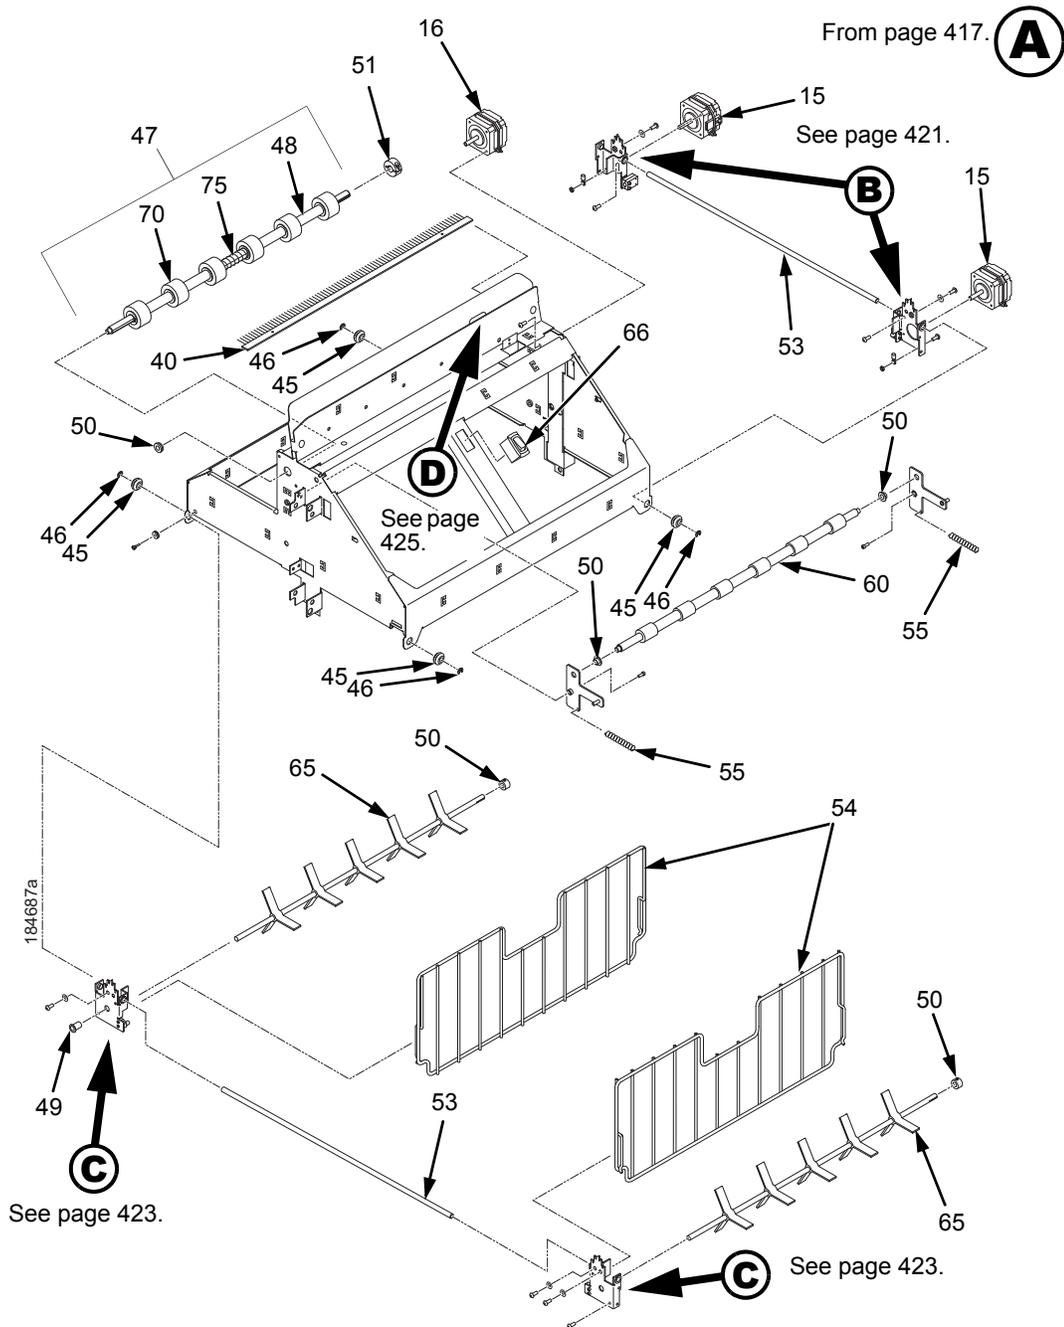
Elevator Detail: Motors, Rollers, and Paddles
